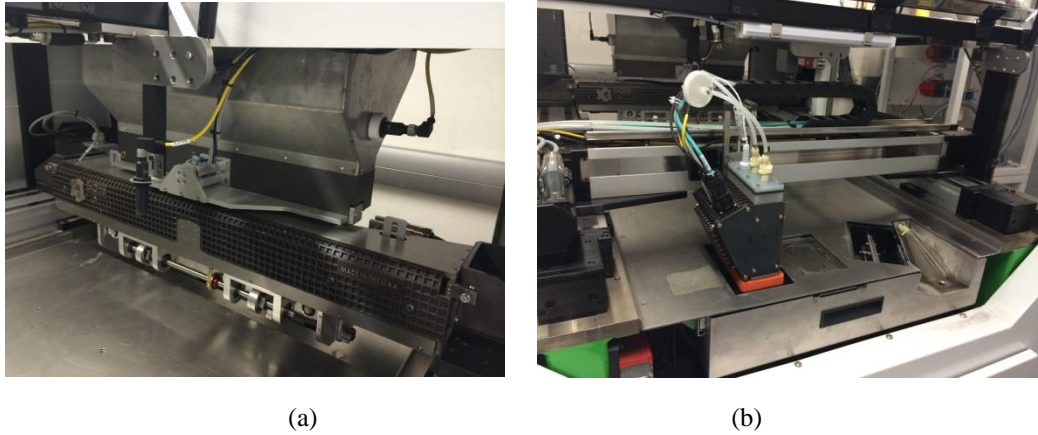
The hopper, recoater and printhead of 3D Printer: (a) hopper and recoater, (b) printhead
